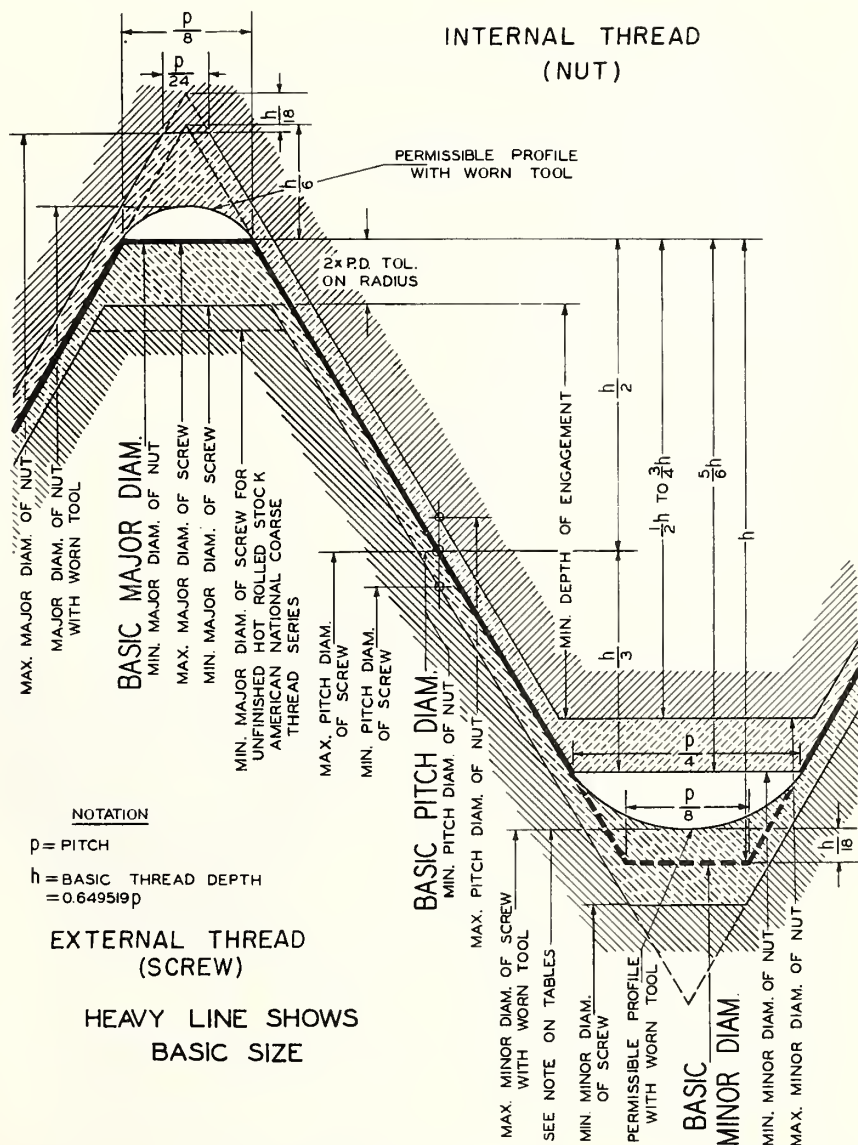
Disposition of tolerances and crest clearances for class 2.
